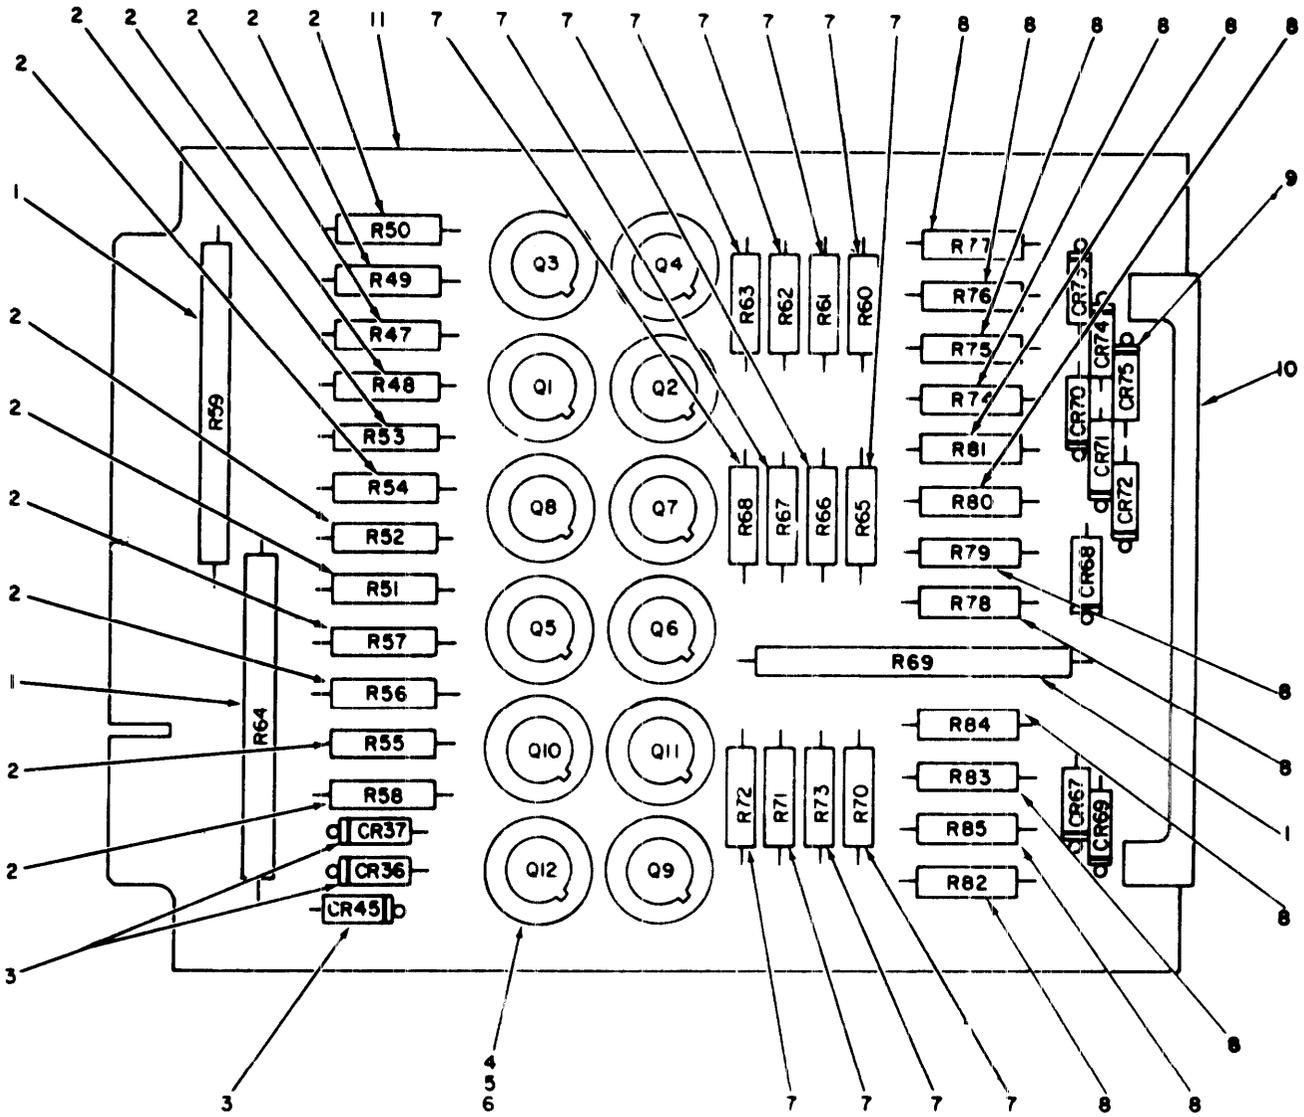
Circuit Card Assembly A2 Component Location Diagram.
